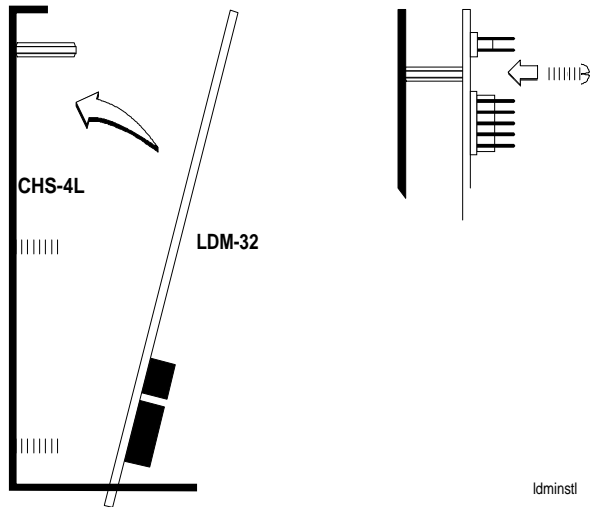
Installing the LDM Module in the CHS-4L Chassis
